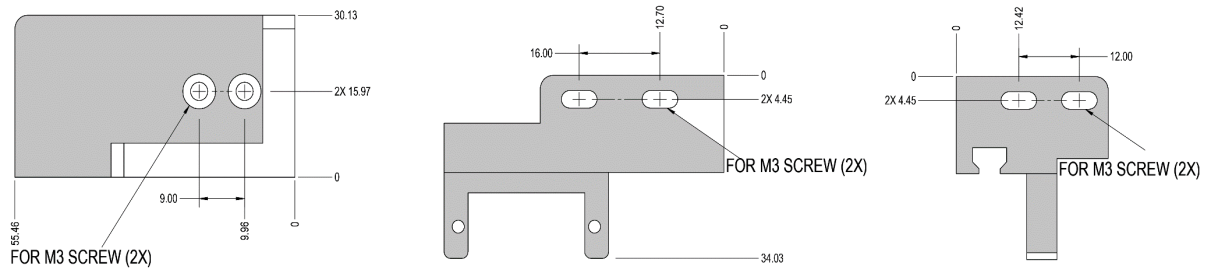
Above is the technical drawing of the 3D-printed motor housings used in the project, showcasing the dimensions and mounting points for the servo motors.
